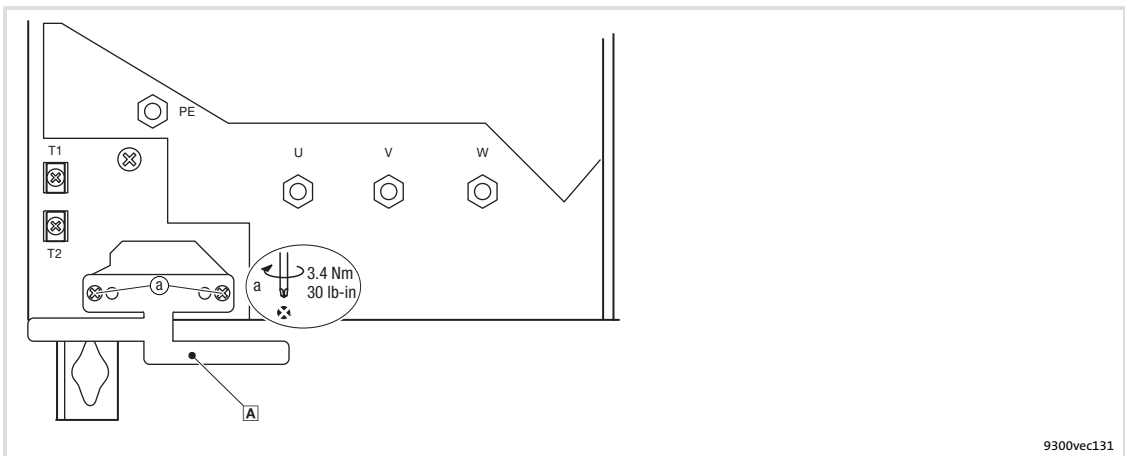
Installation of shield sheet for drive controllers 15 ... 30 kW
